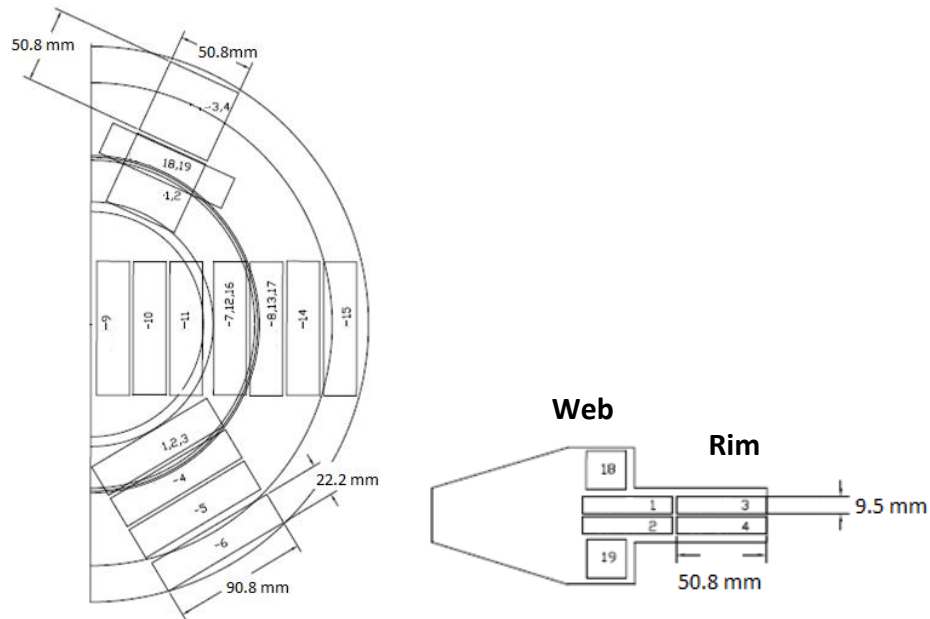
An example schematic of the crack growth specimen layout within the forging material
